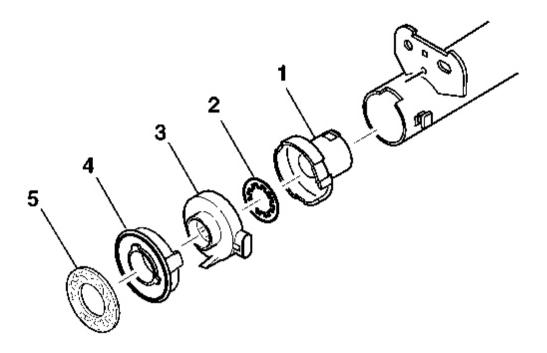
Steering Shaft Seal, Sensor Retainer, Sensor Assembly, Lower Spring Retainer, Adapter & Bearing Assembly (Telescoping)
